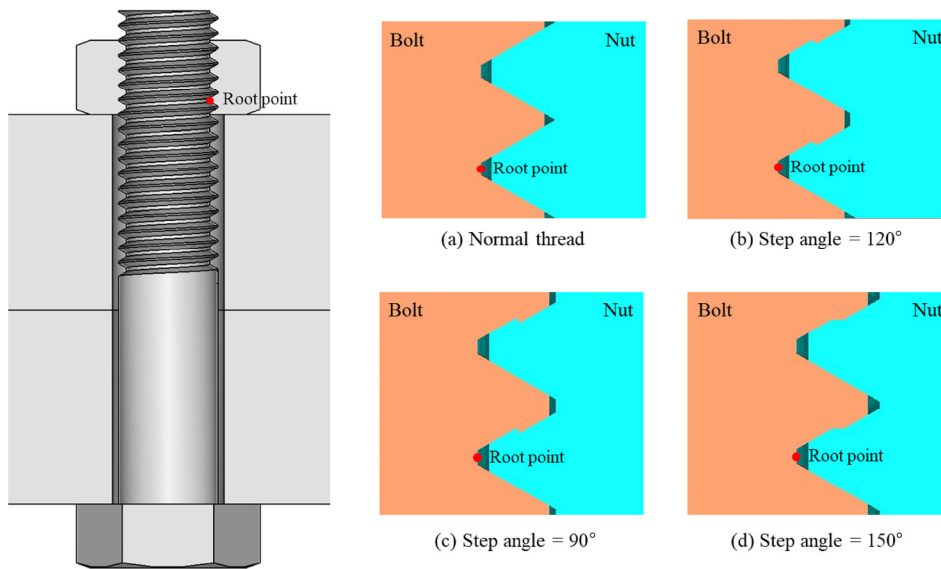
Root points of the first engaged thread in the regular bolt and novel bolts with different step threads.
